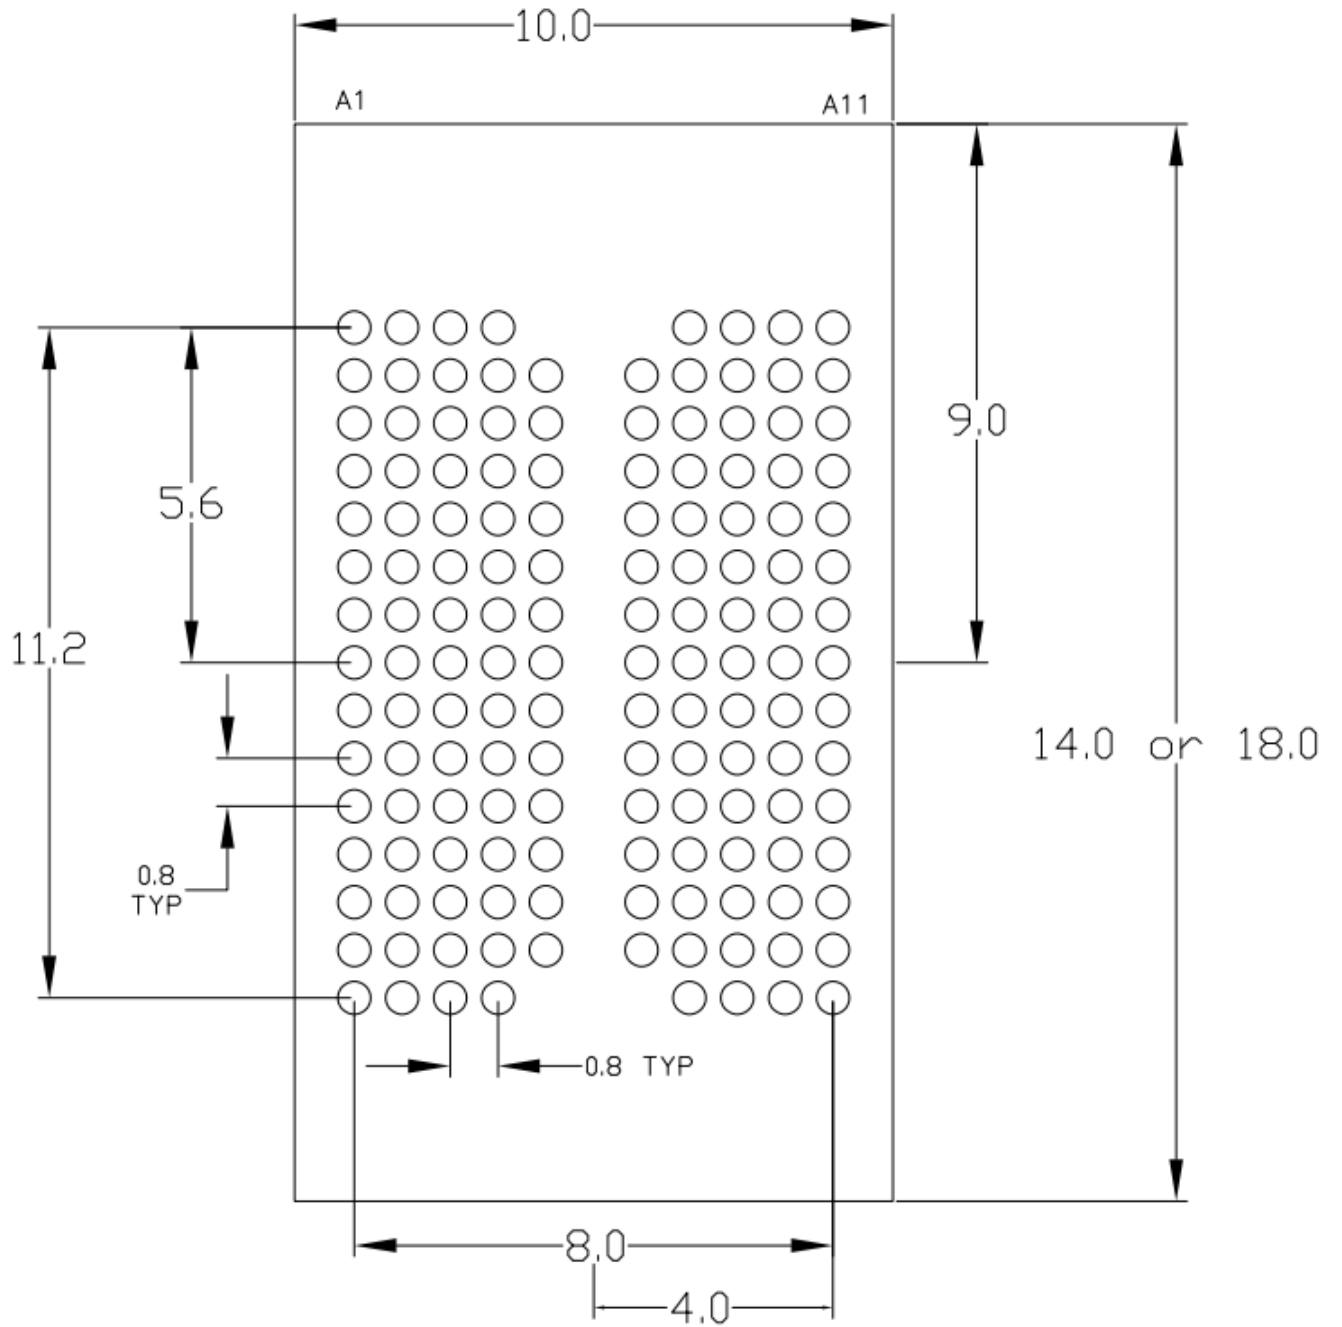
BGA-146 ball spacing requirements (top view, dimensions in millimeters)
